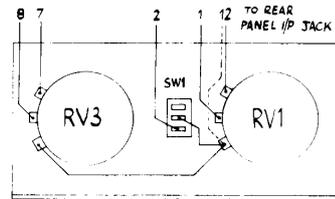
Front Panel Wiring for External Inputs (3800 only)
